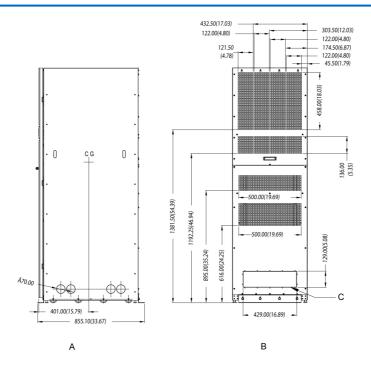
UPS cabinet dimensions 93E UPS 100-120 kVA (back and right side views)
